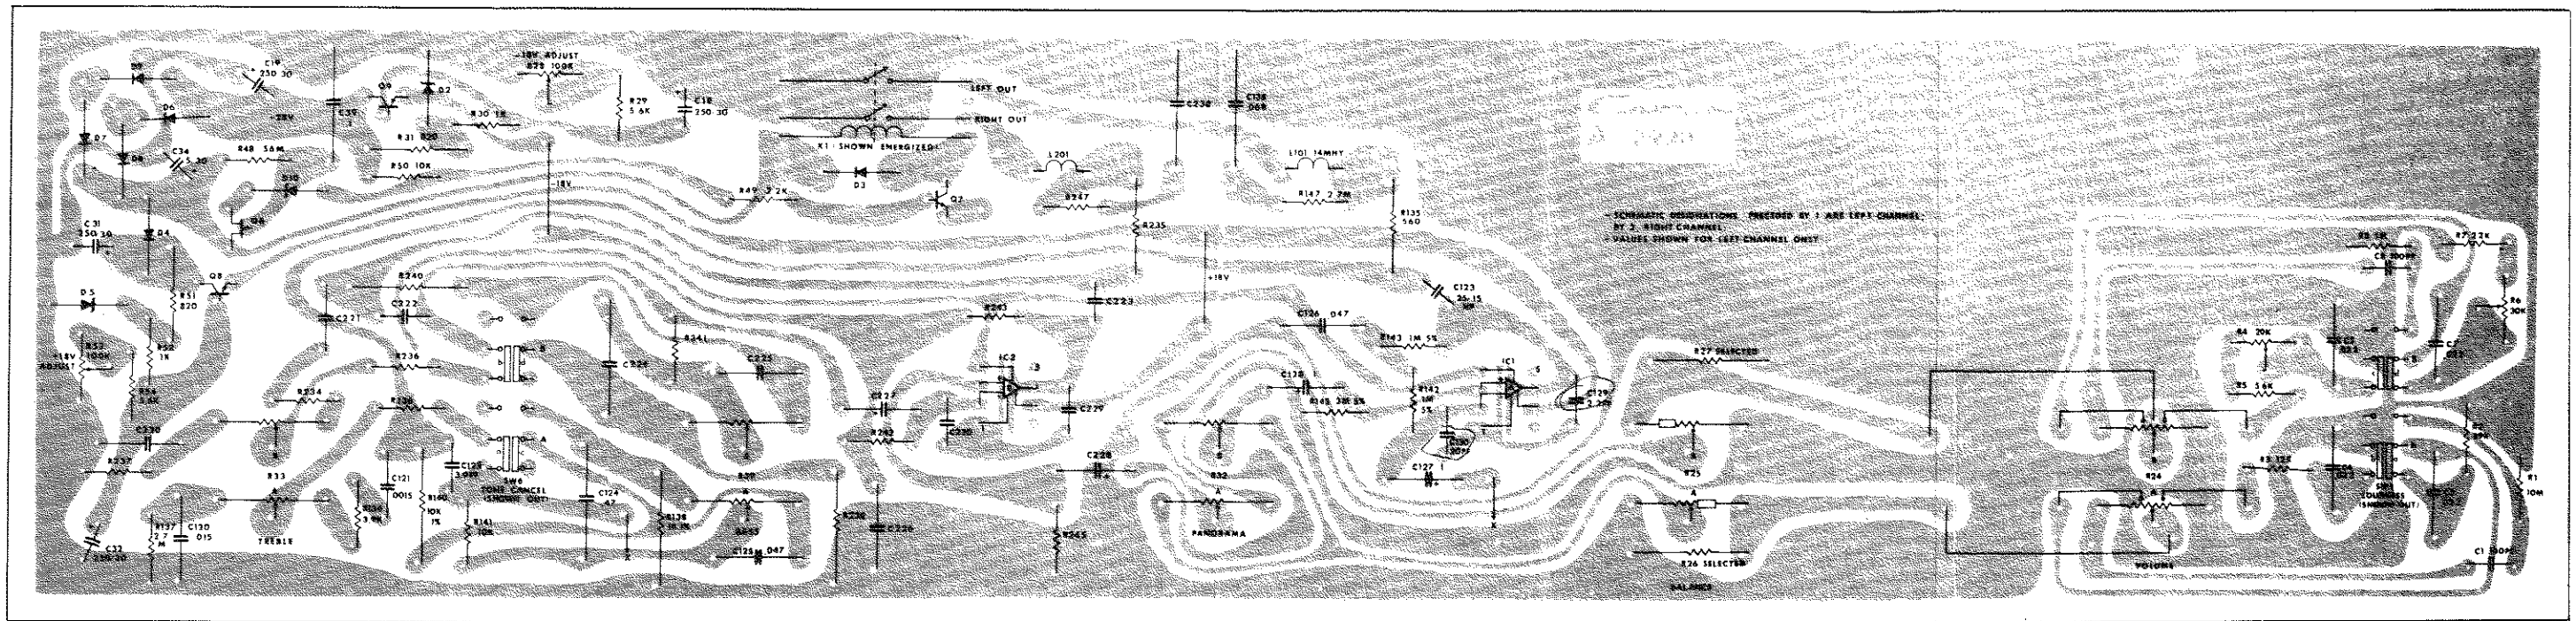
COMPONENT LOCATION, MAIN PC BOARD, 7867
